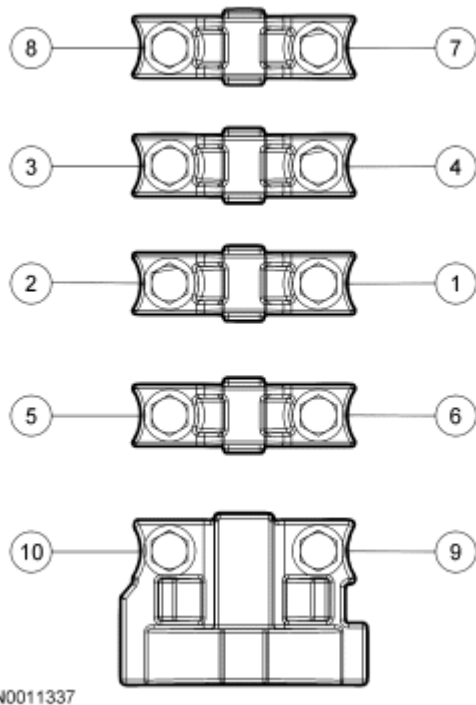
Identifying Camshaft Bearing Cap Bolt Loosening/Tightening Sequence
